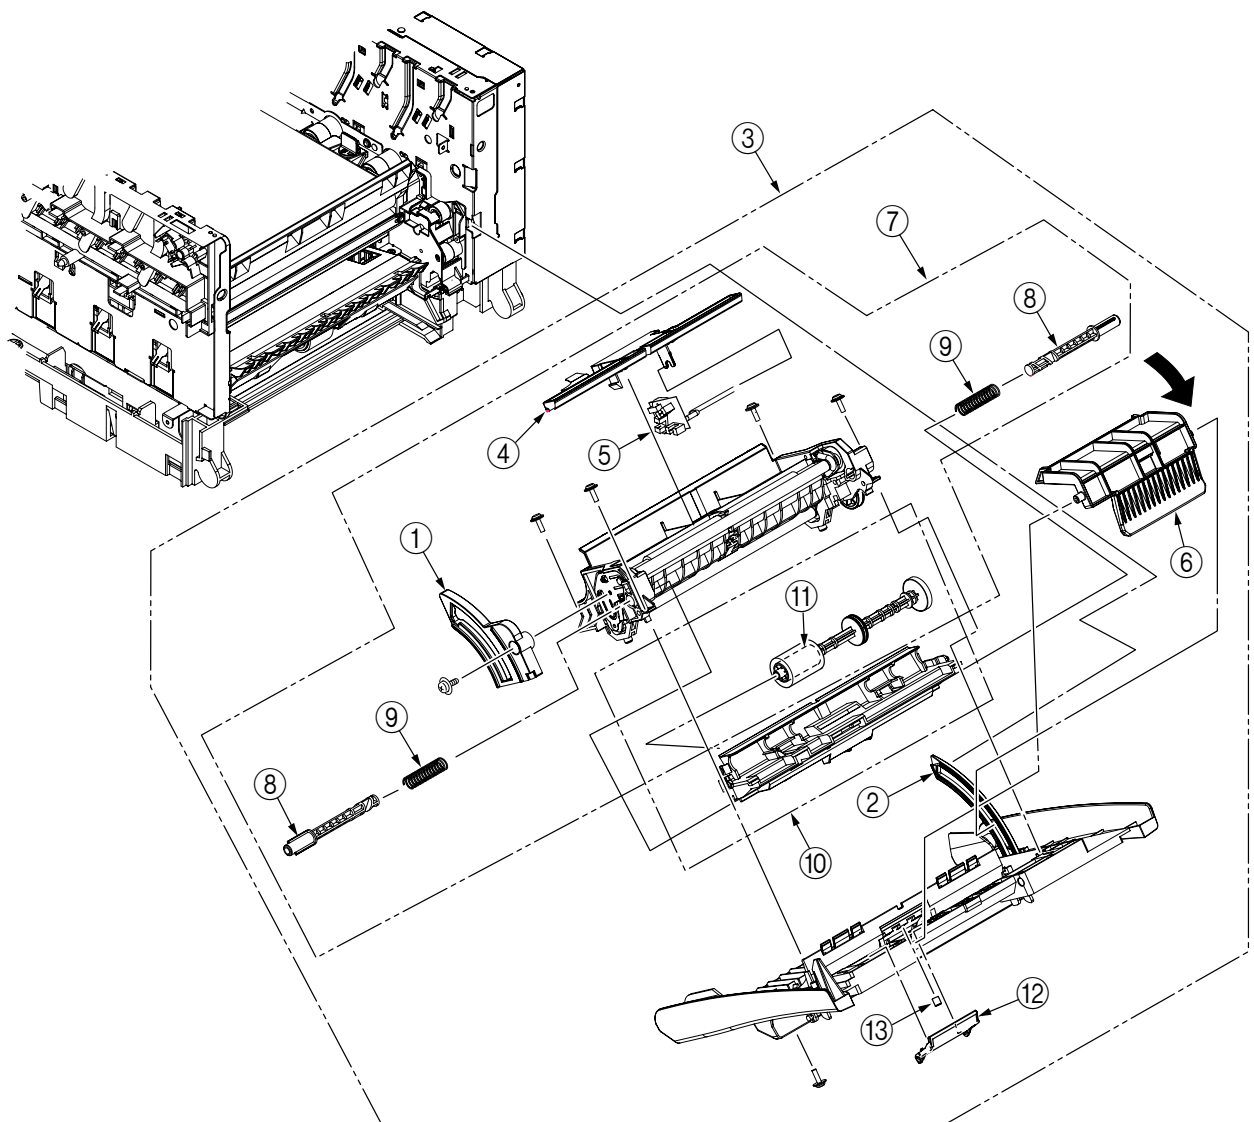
Feeder Unit / Board-RSF / MPT Hopping Roller / MPT Frame Separator / Cover-Front
